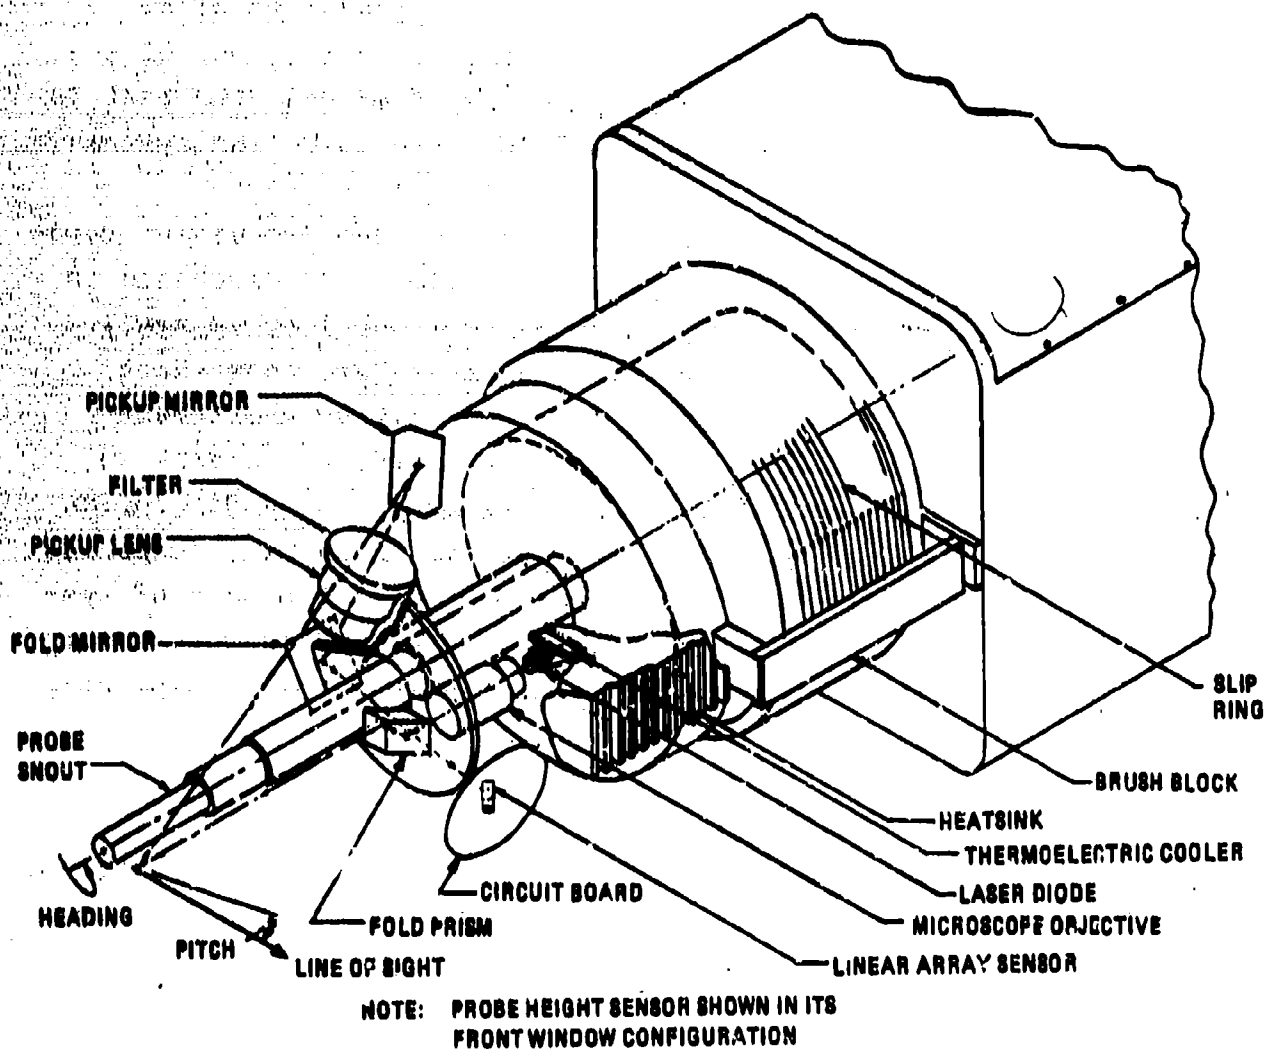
PHYSICAL PACKAGING OF PROBE HEIGHT SENSOR
